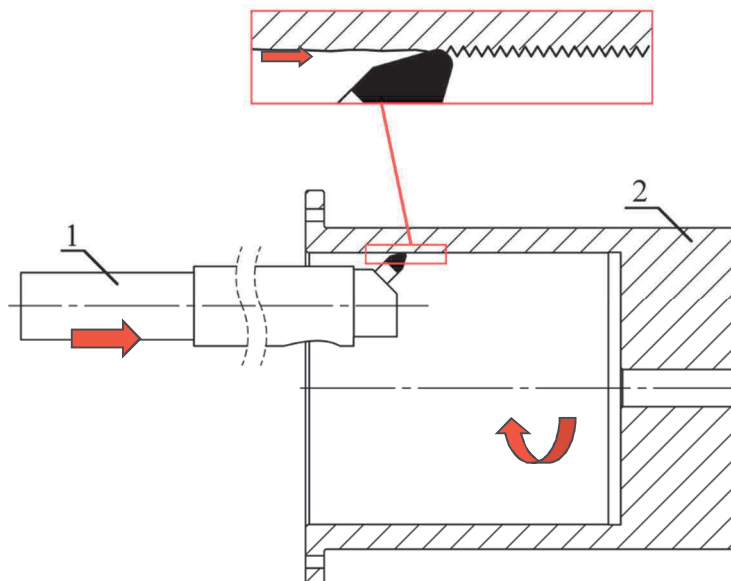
Diagram of diamond tool forming; 1 - forming tool, 2 - workpiece
